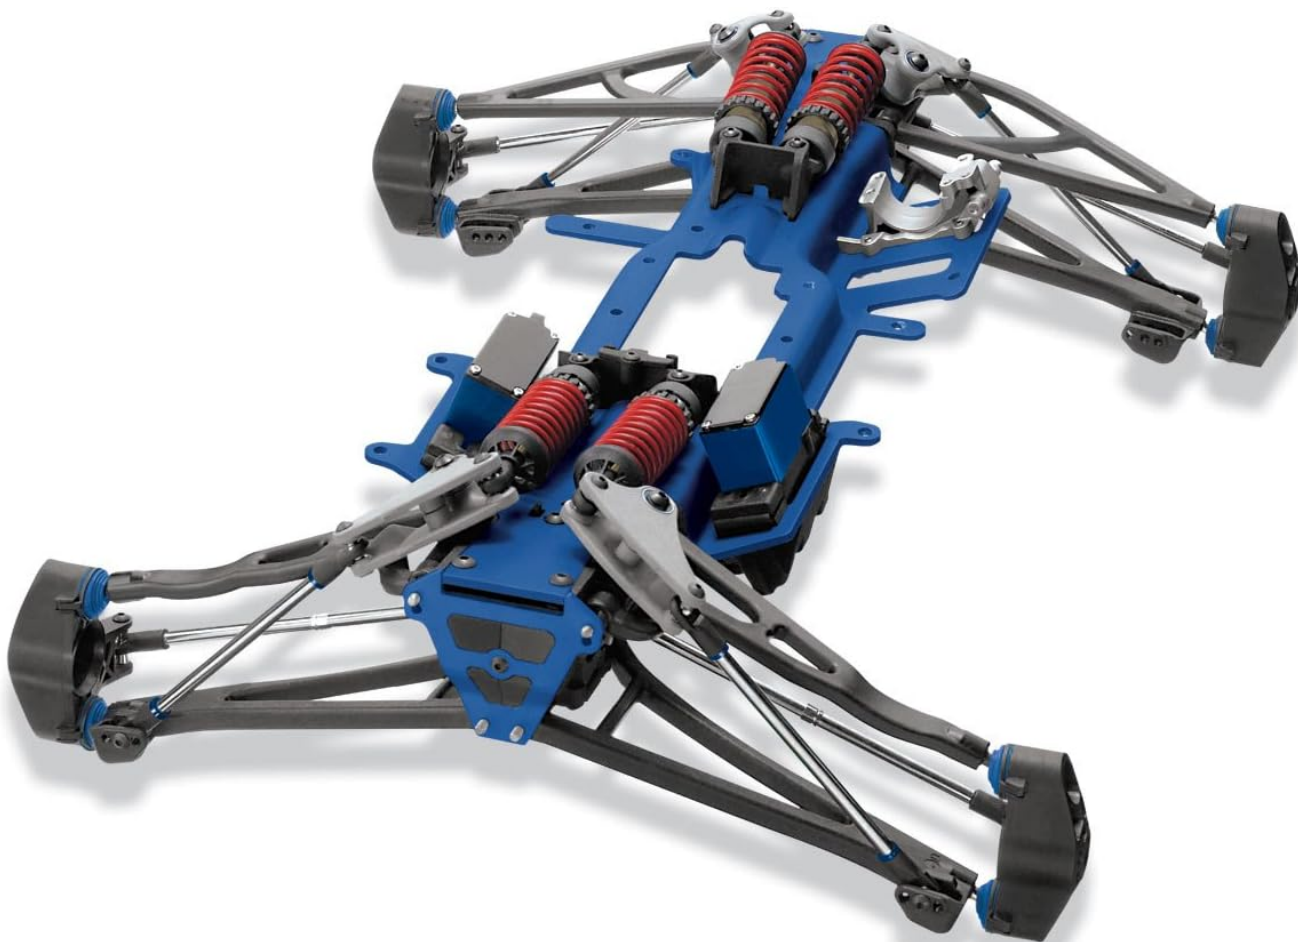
Close-up view of the Revo 3.3's robust chassis and suspension system, highlighting key areas for inspection and maintenance.
